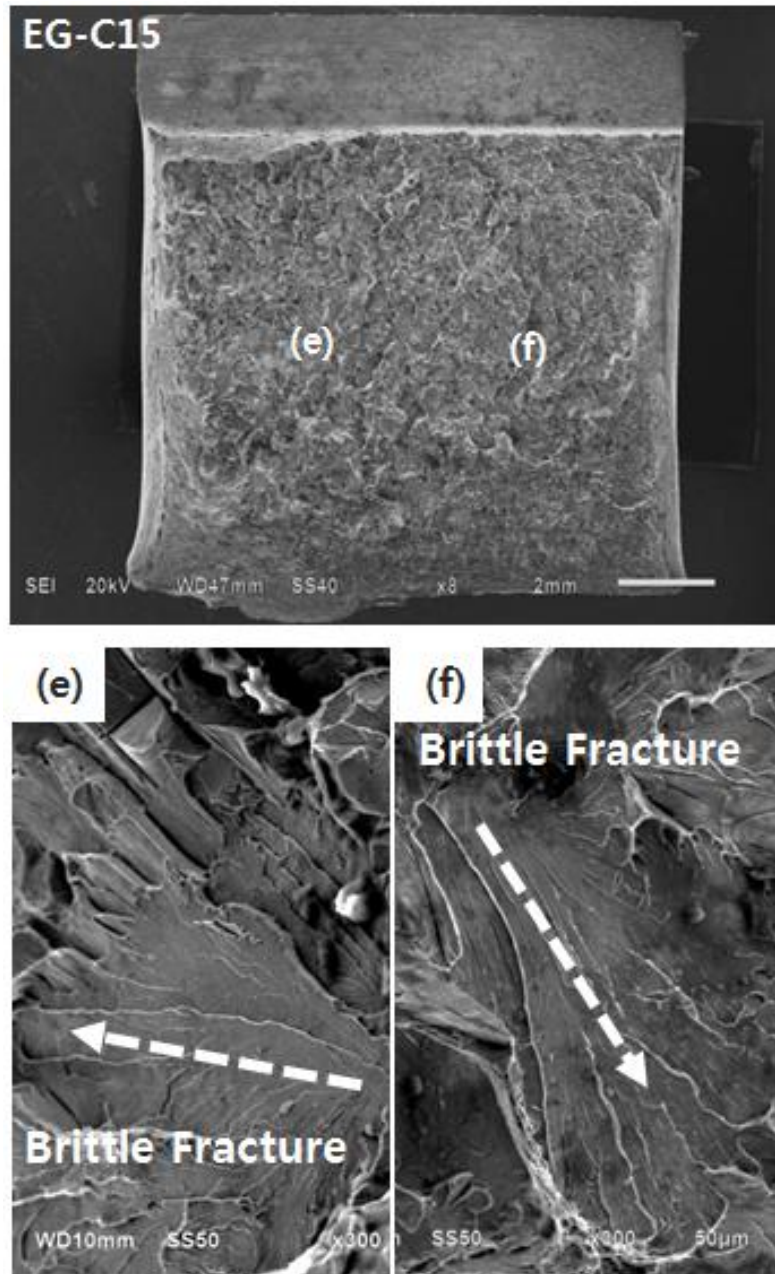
Fractographs of Charpy impact specimens fractured at 0°C for the EG-C15 fusion line specimen
